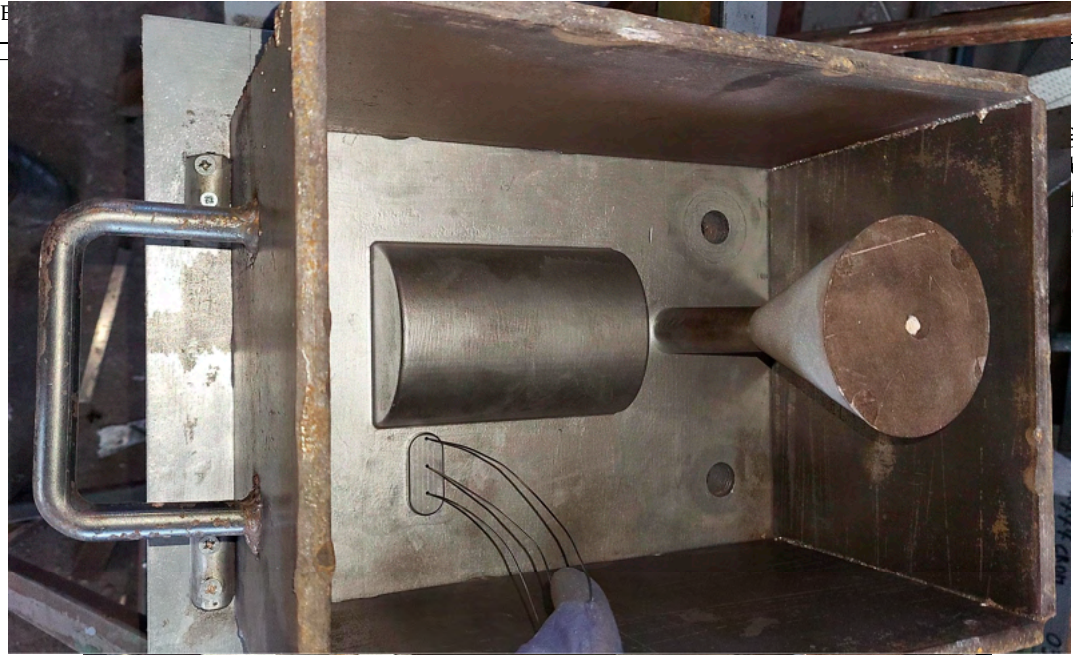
Forming equipment with an insert for retaining the thermocouple stems.
